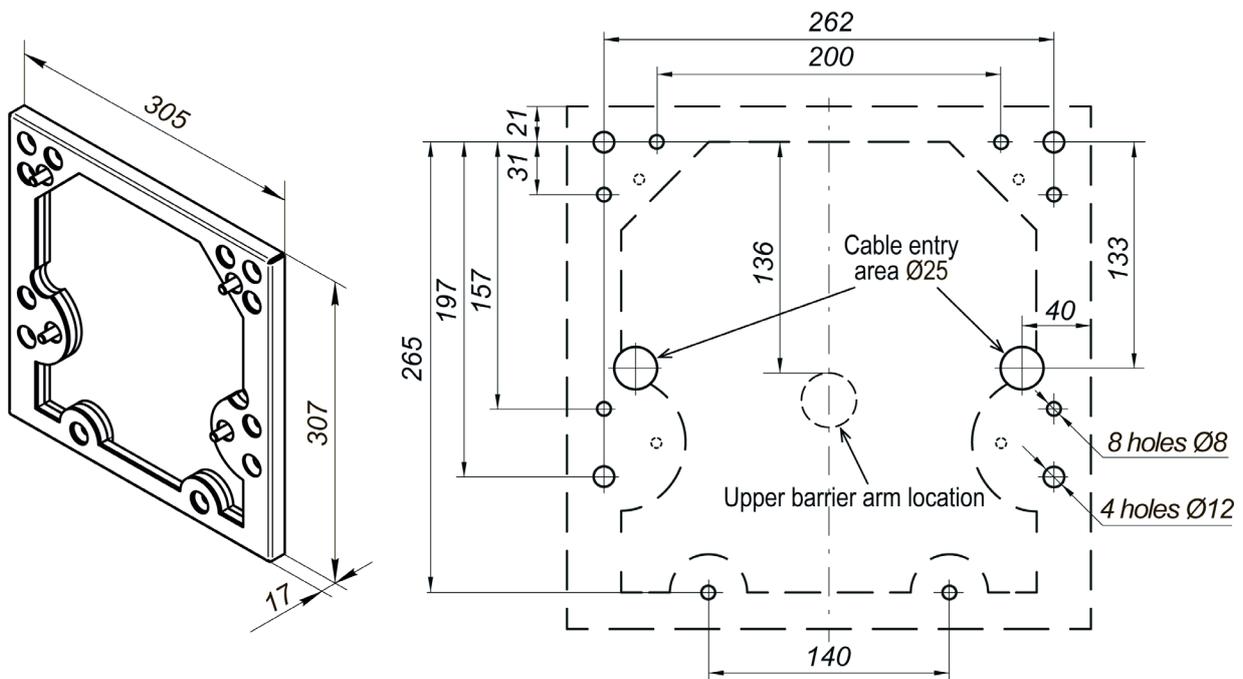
Dimensions and layout of holes on the wall for fixing the MT10.2 bracket
